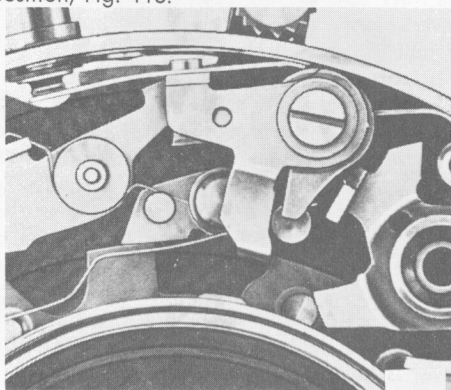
SYNC DRIVE SECTOR REMOVED FOR CLARITY
